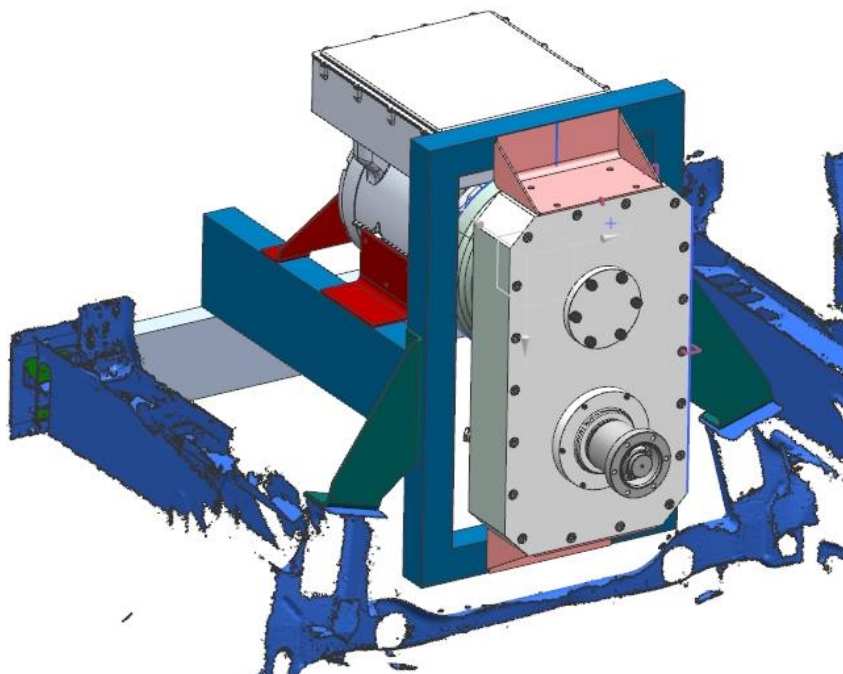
Rear 3D view of the powertrain sub frame with the motor and gearbox assembled. In dark green the rear connection with the chassis of the vehicle
